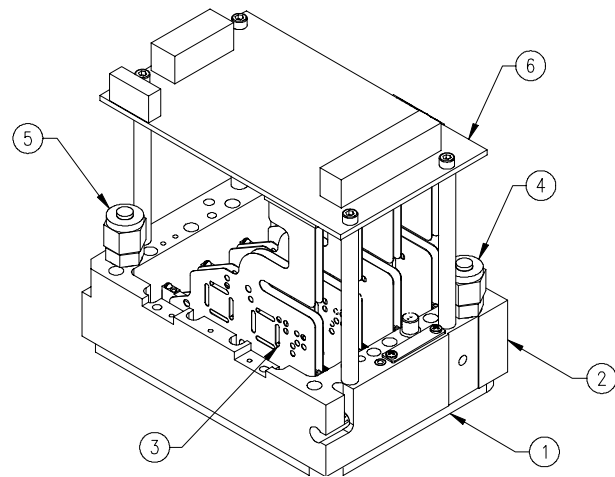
2.56 inch wide print swath assembly. 1: Nozzle/manifold assembly; 2: Supporting frame; 3: Twelve Jet modules; 4 Ink outlet; 5: Ink inlet; 6: Swath drive electronics interface board
